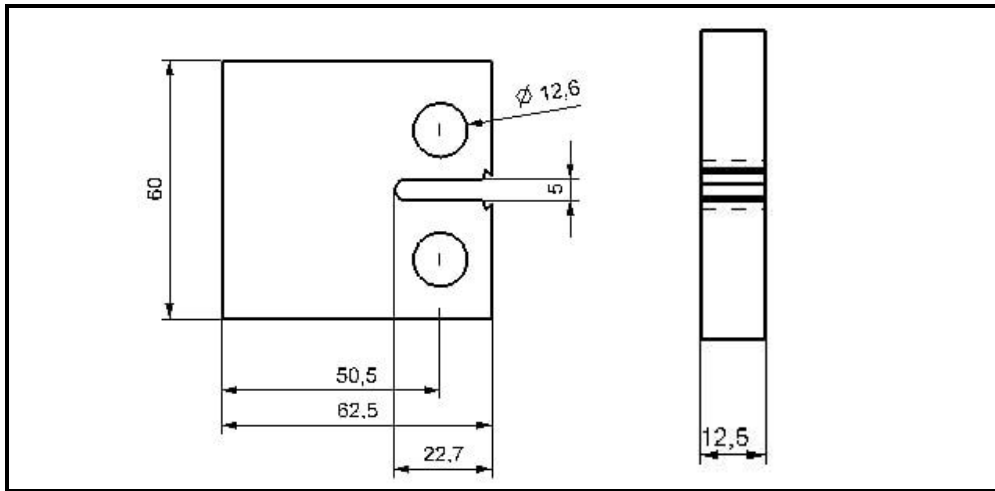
Schematic diagram showing test specimens used to conduct FCGR tests; Compact tension (CT) (All dimensions in mm)
